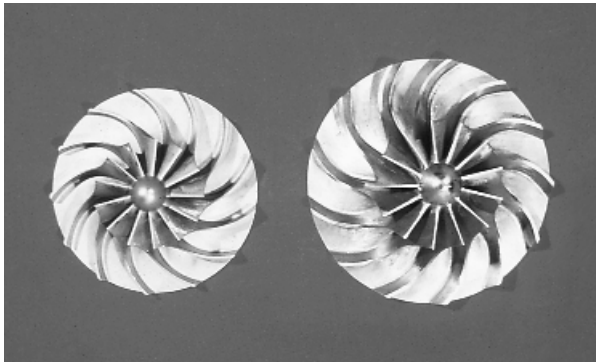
Cast three-dimensional open impeller. (*Dresser-Rand Company, Olean, N.Y.*)
